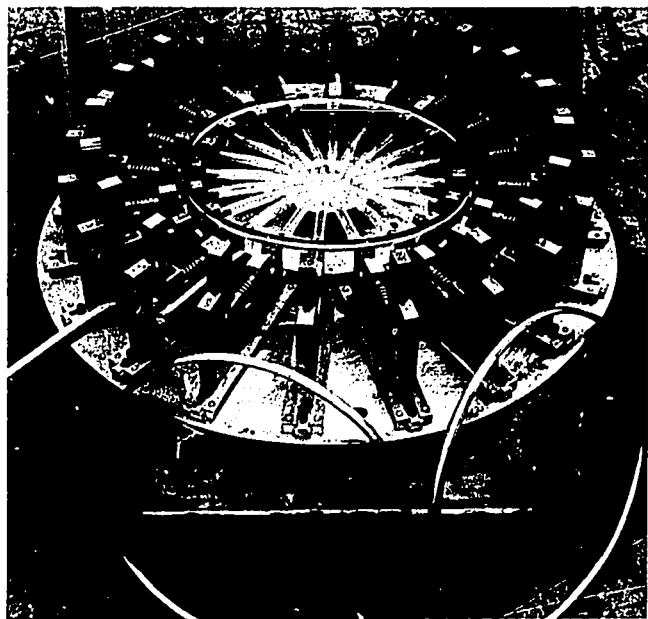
Tool designers must often design and have built special handling equipment before a machine can be used for production.
